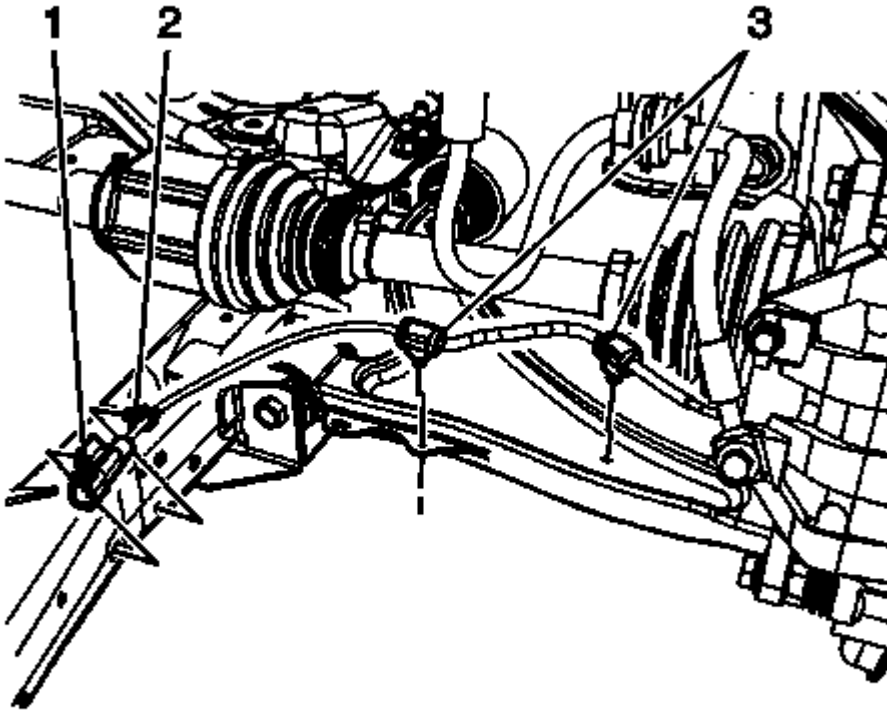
Wheel Speed Sensor Electrical Connector & Harness Clips
